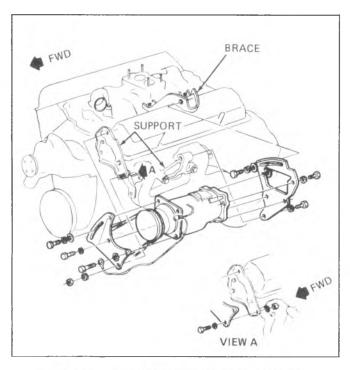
A-13V-A/C Compressor mounting-Small V-8
